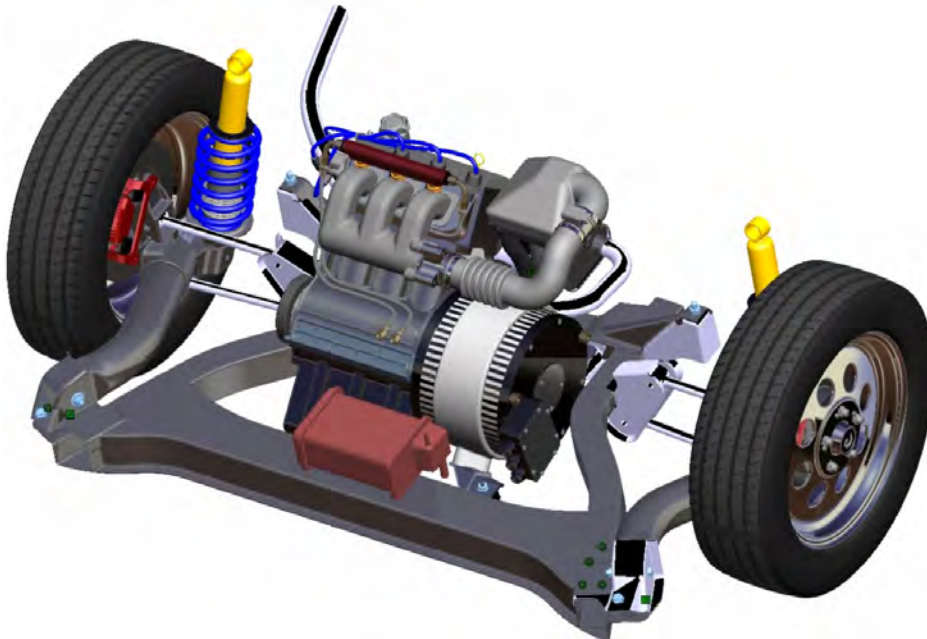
FSV-1 PHEV₂₀ rear suspension assembly
